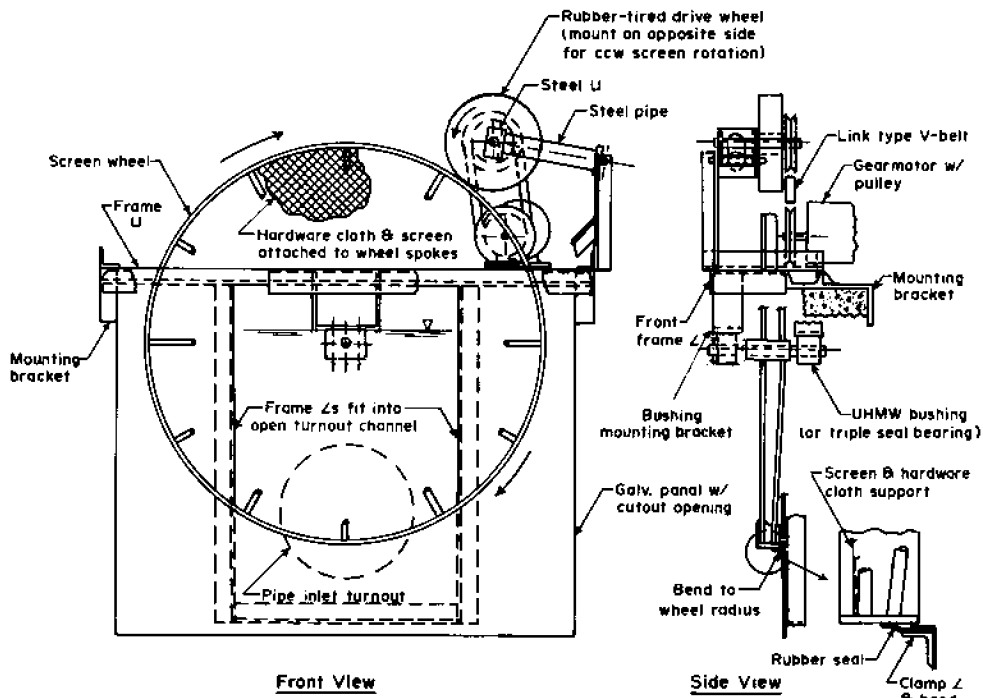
Schematic drawing of a rotating wheel trash screen.
